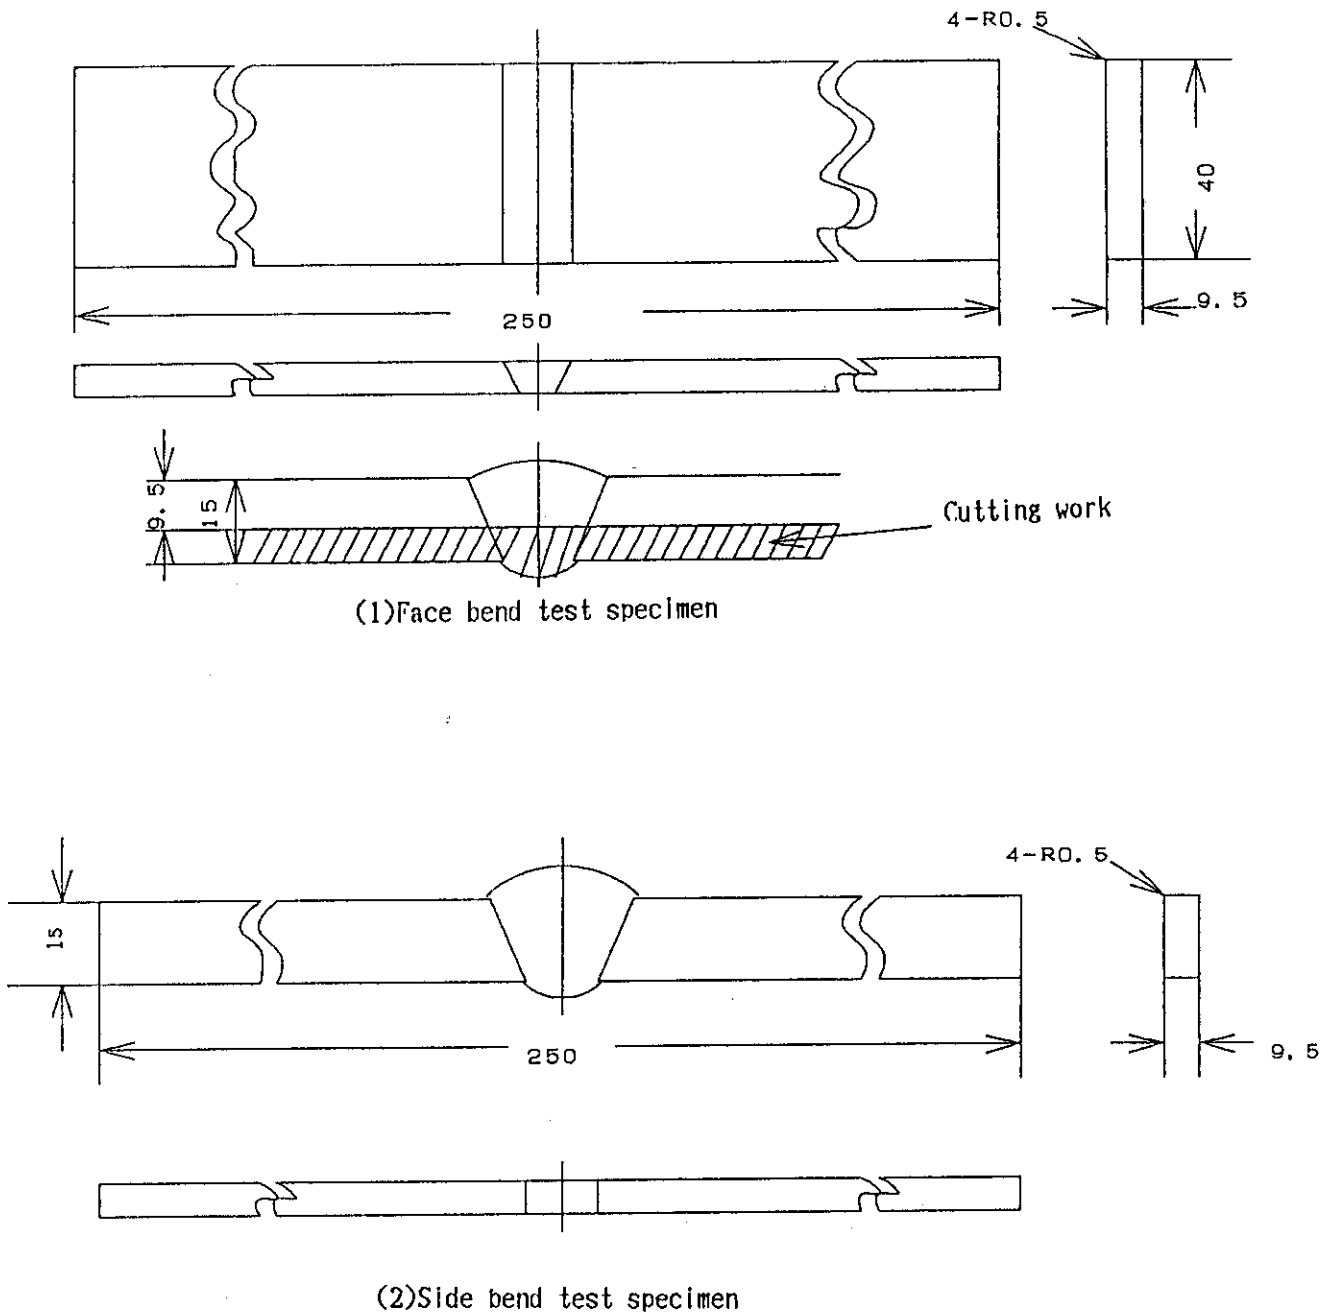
Shape of guide bend test specimen (thickness: 15mm plate)
